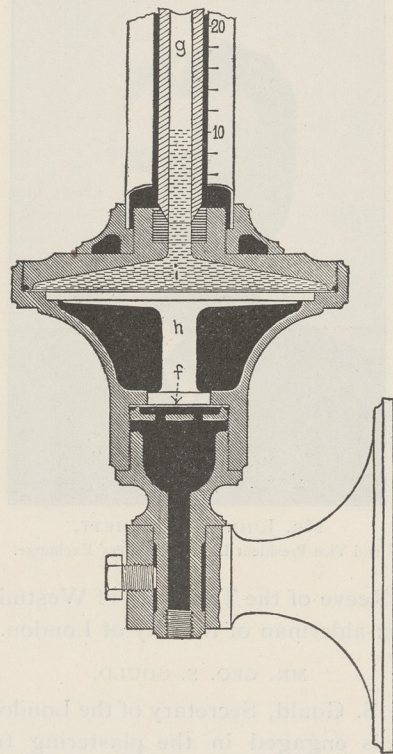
SECTIONAL VIEW OF THE SHAW MERCURY GAUGE USED AT PHOENIXVILLE.
